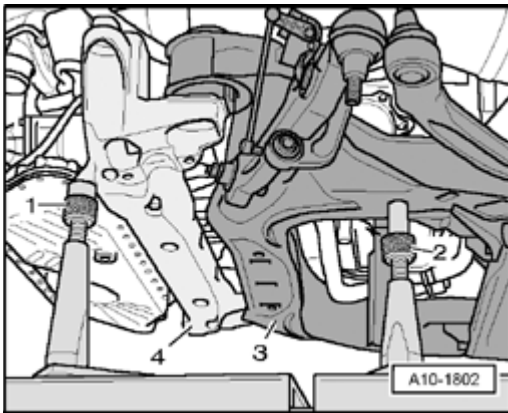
Identifying Subframe, Left/Right Of Engine Carrier & Support Elements
